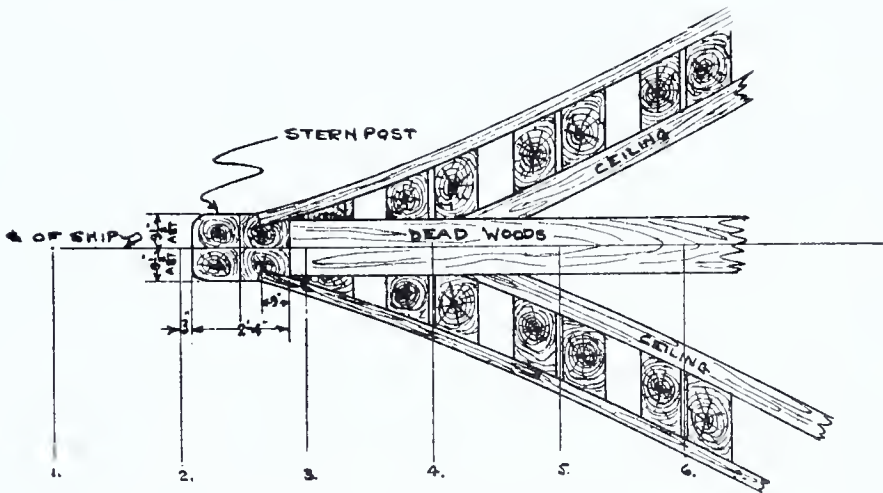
Sectional plan view of stern showing planking rabbeted into stern-post and deadwood; also cant frames and ceiling.
